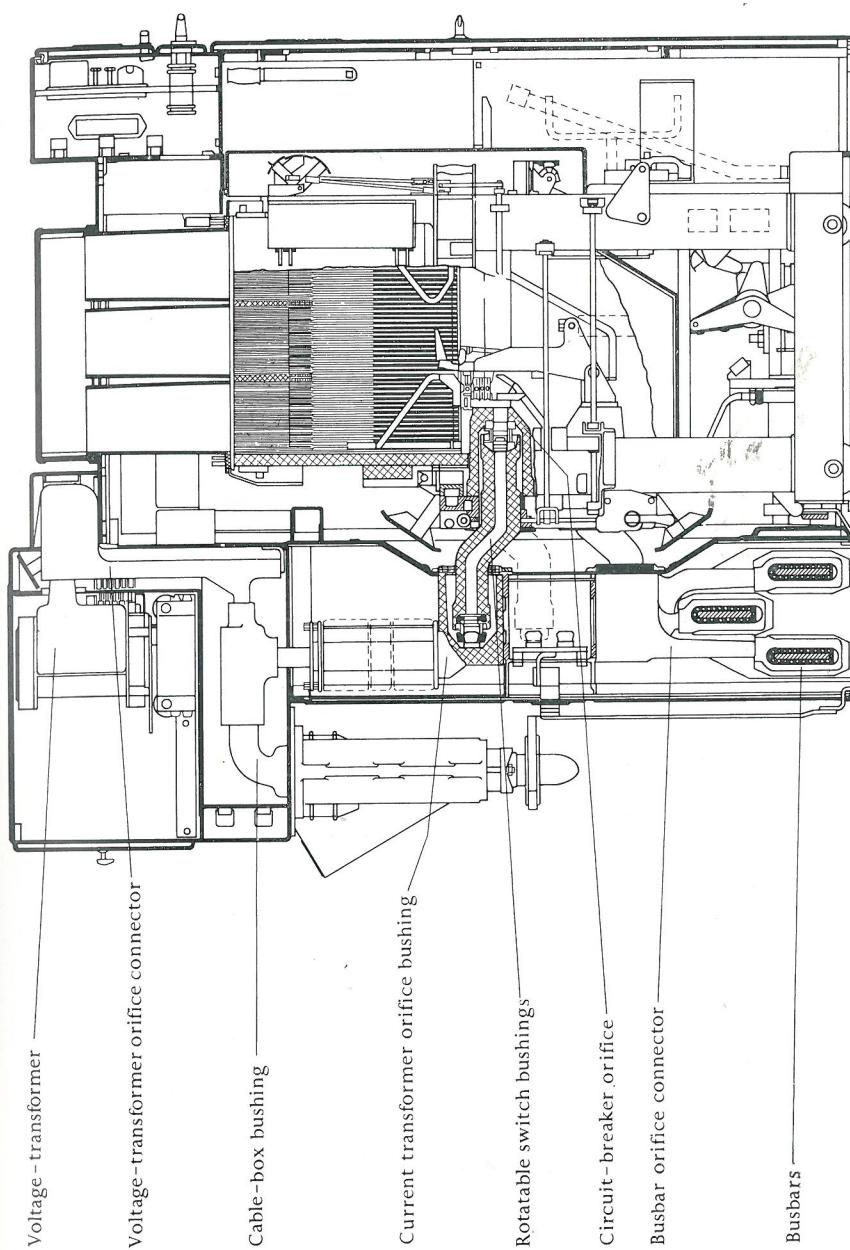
Indoor air-break switchgear unit, 1600 A 11 kV 500 MVA, showing cast resin parts.
